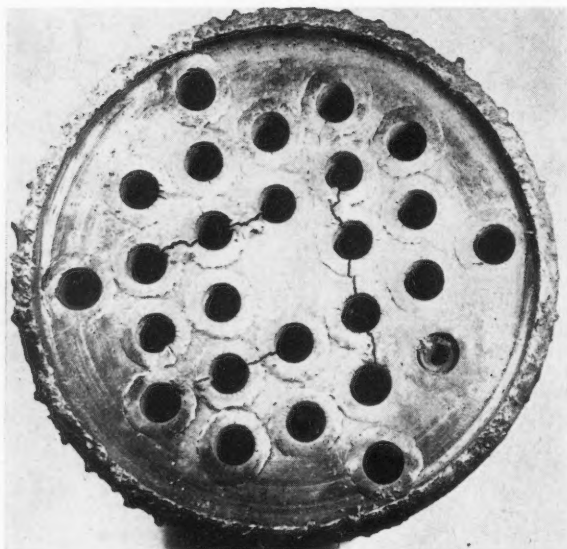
Case 2. View of top tube sheet of AISI 347 waste heat boiler after 6-8 months.
